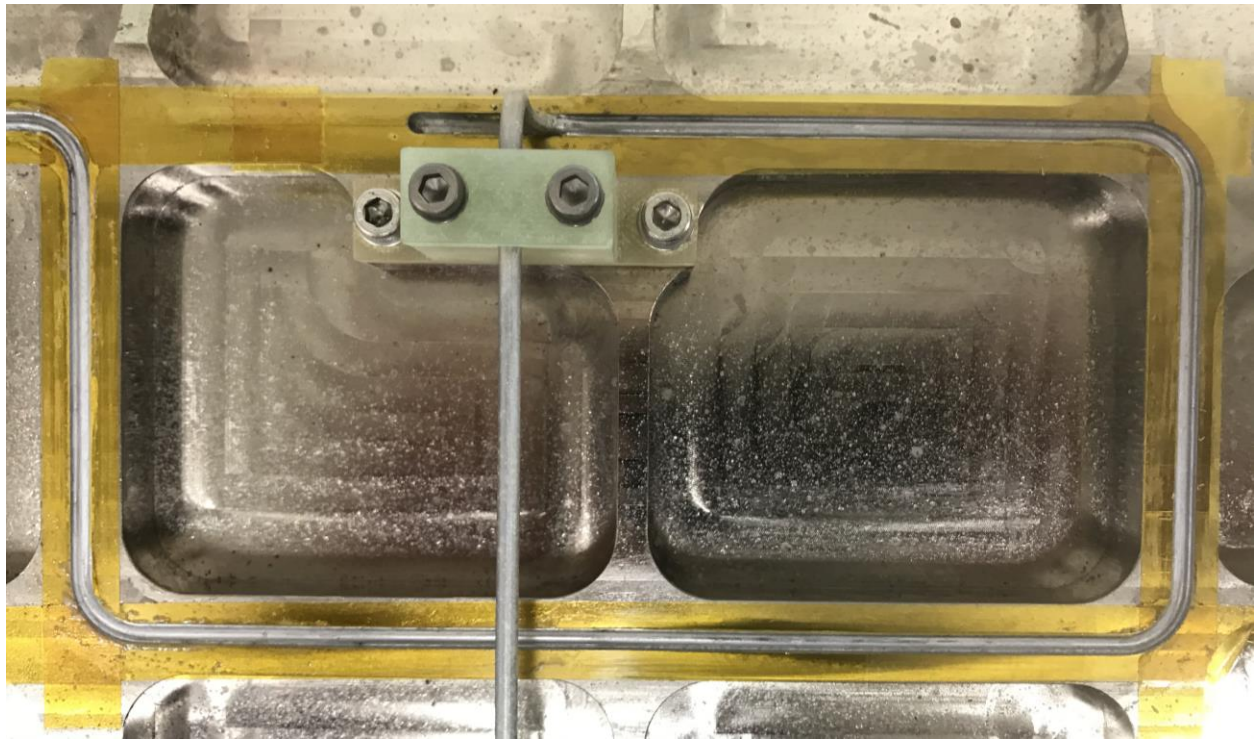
Condenser Section of the Transport Line Soldered into the Serpentine Groove in the Radiator Panel, with a G10 Tube Support Mount
